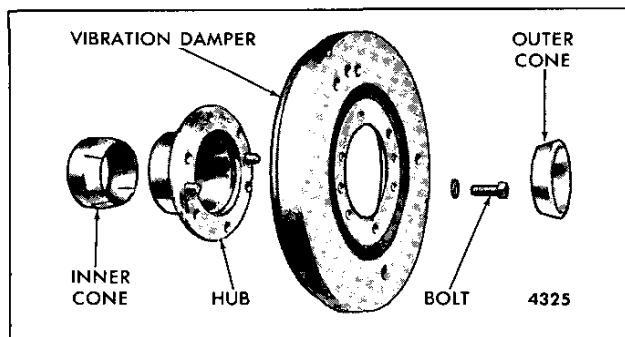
Vibration Damper Details and Relative Location of Parts
